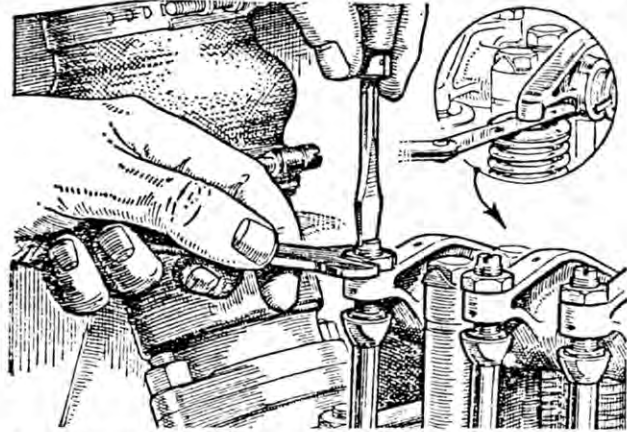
Adjusting screw on pushrod end of rocker arm can be turned after locknut is loosened. Inset shows feeler gauge inserted under valve end of rocker.
